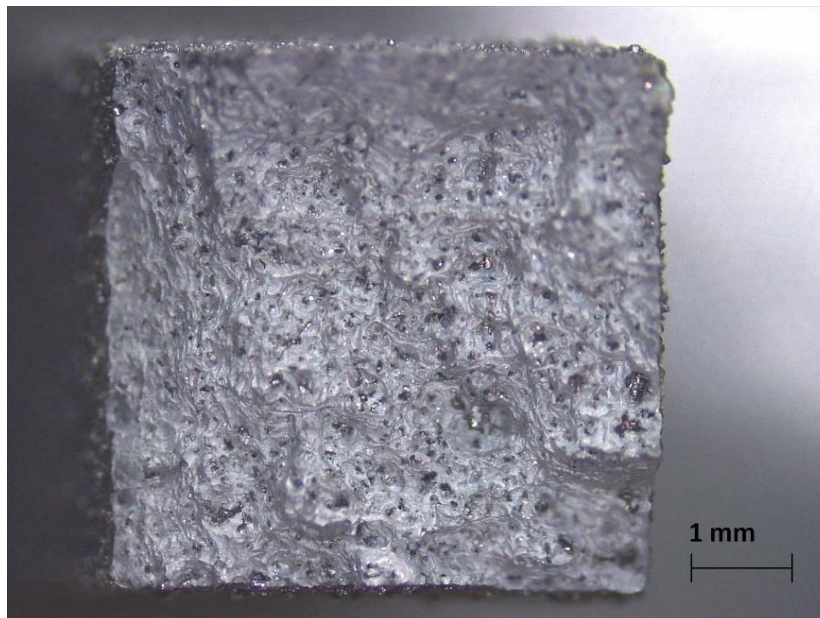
Fracture surface of a AlSi10Mg tensile specimen by stereomicroscope.
